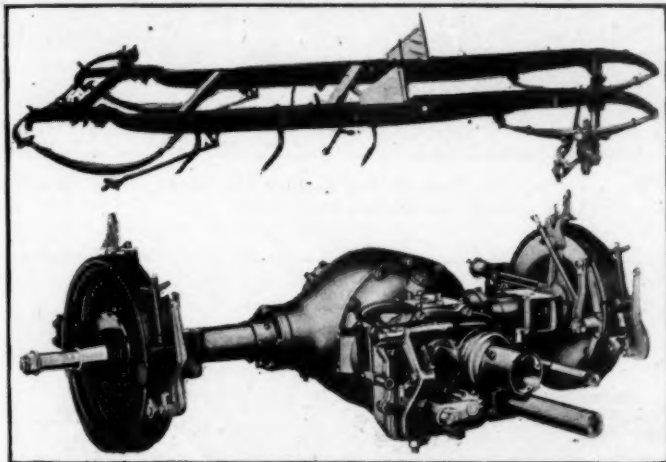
Packard six frame, showing three-quarter elliptic rear springs, raised frame construction at the rear and the rear axle
